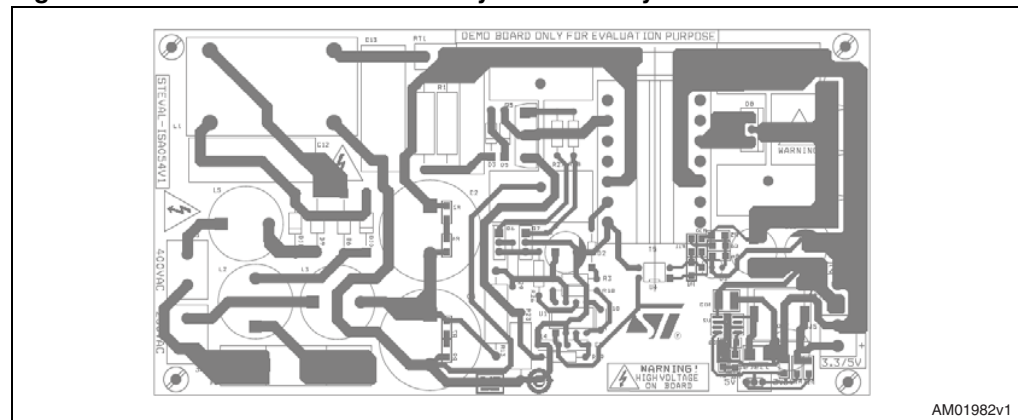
STEVAL-ISA054V1 board layout: board layout and tracks
